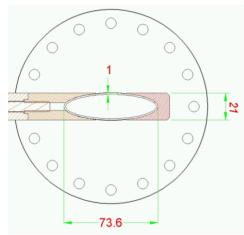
A 304 SS tube with both sides supported and the CF 100 flange
